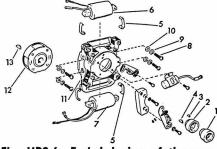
Exploded view of the magneto assembly used on Hummer, Super-10, Ranger, Pacer and Scat models.
